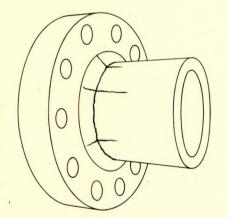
Sketch showing typical cracks in pipe flange weld
